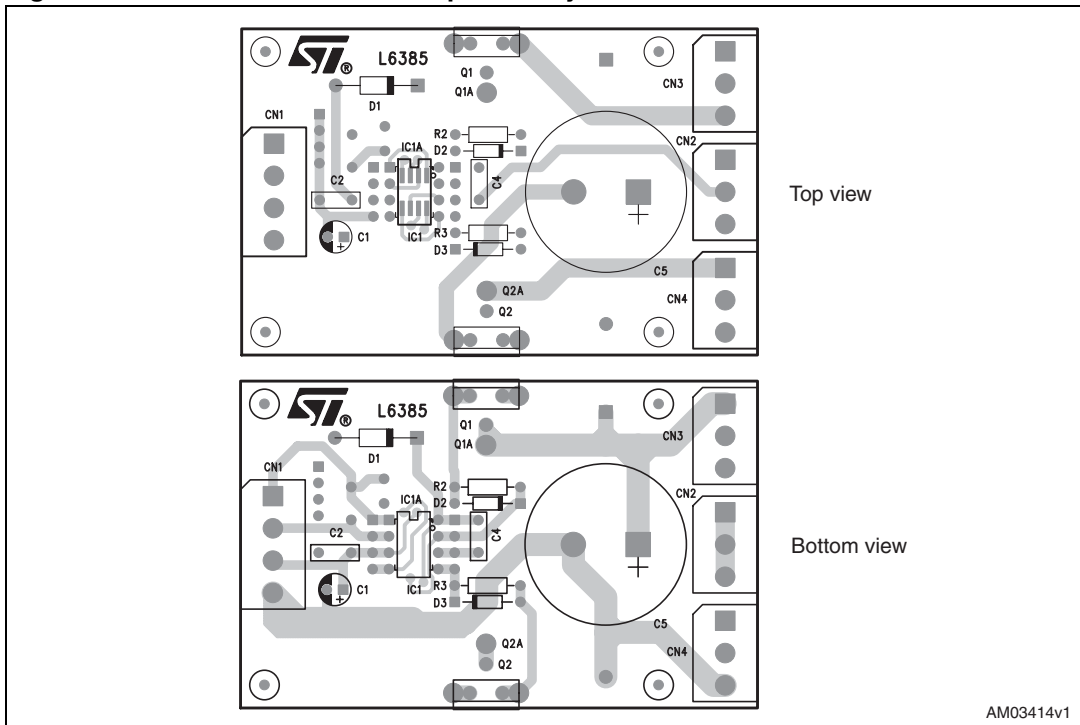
L6385E - PCB and component layout of the evaluation circuit
